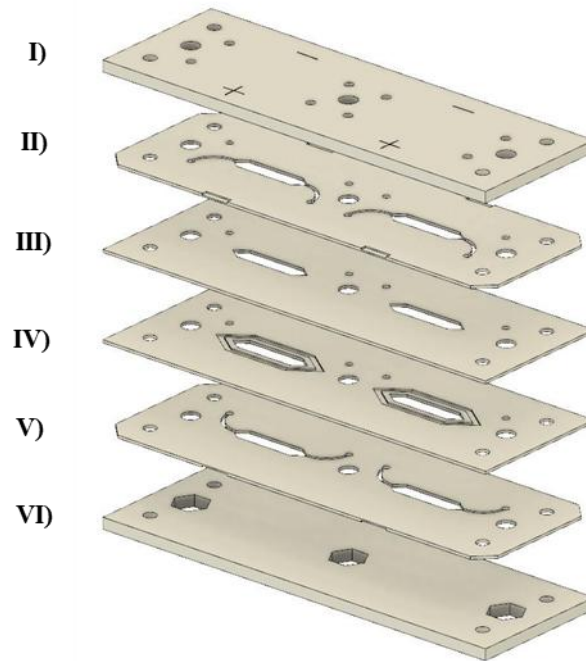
CAD design of the exploded view of the LoC into its six functional layers.
